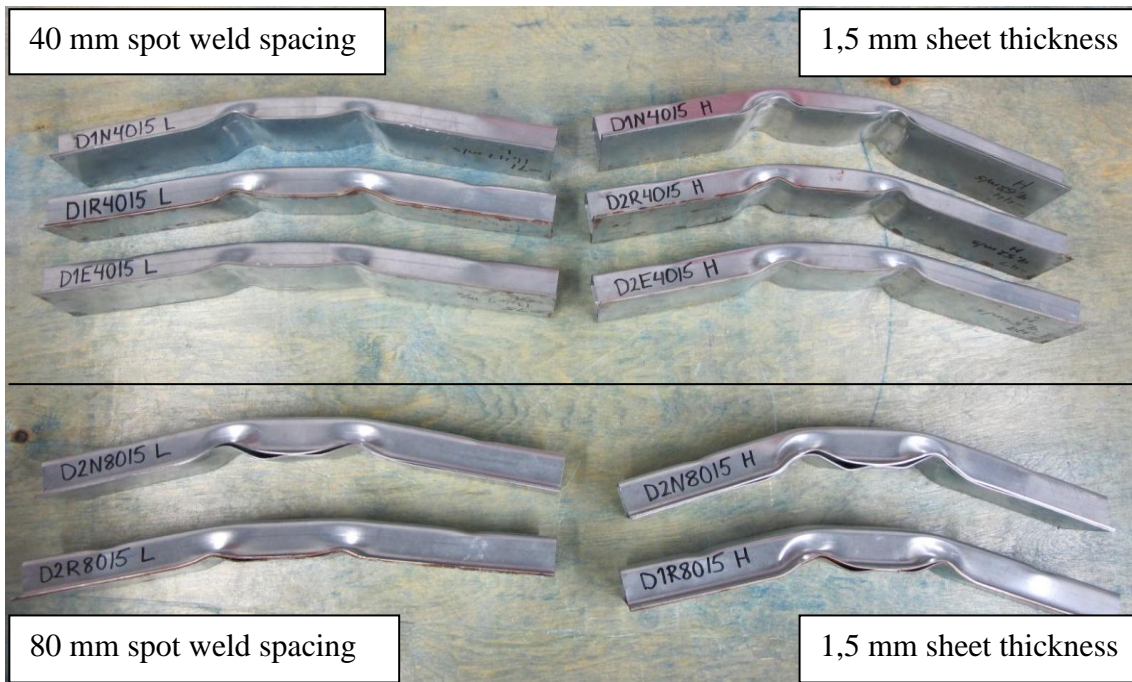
All the beams in the picture are in sheet thickness 1,5 mm. The upper part is showing 40 mm spot weld spacing and the beams are grouped. From top: RSW, rubber weld bonded, epoxy weld bonded. The lower part of the picture is showing 80 mm spot weld spacing. The beams are positioned in pairs. From top: RSW and rubber weld bonded.
